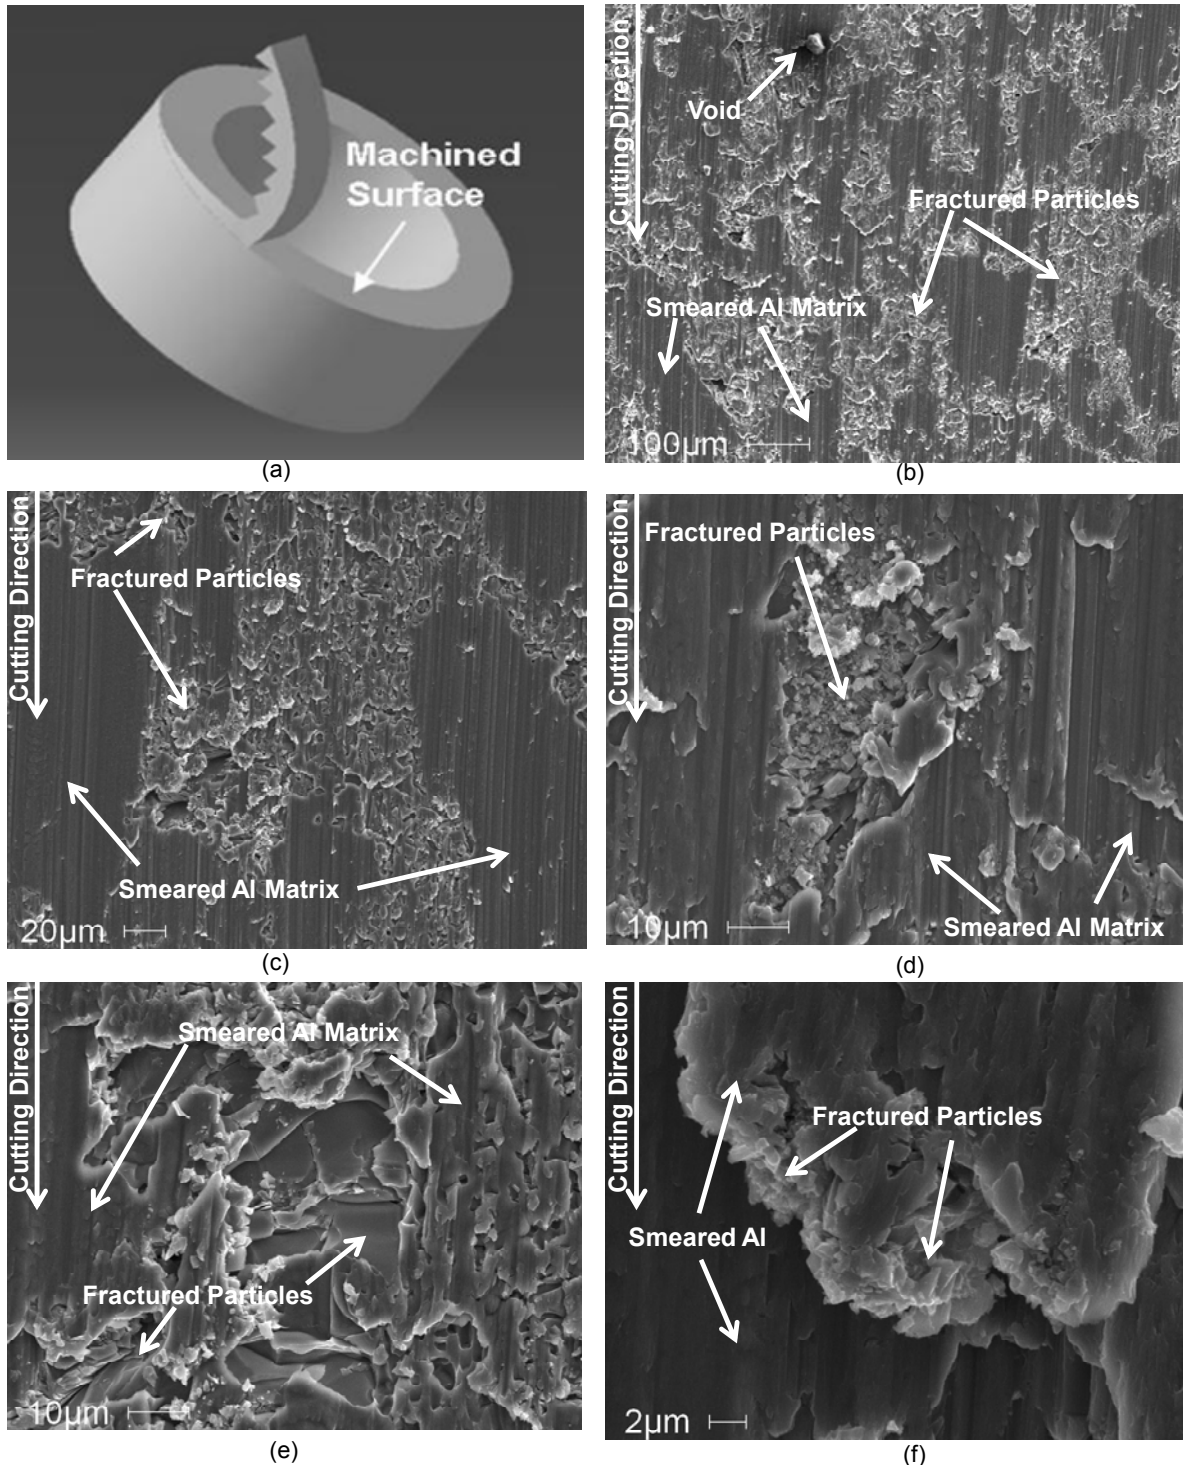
(a) Schematic diagram showing surface generated after machining or ‘machined surface’, (b-f) SEM images of machined surface showing surface conditions on this surface.
